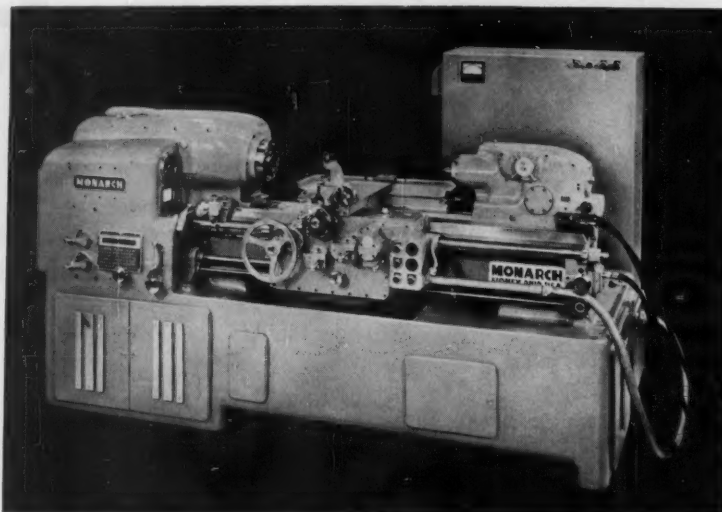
Precision turning lathe for manufacturing and toolmaking applications developed by Monarch Machine Tool Co.
